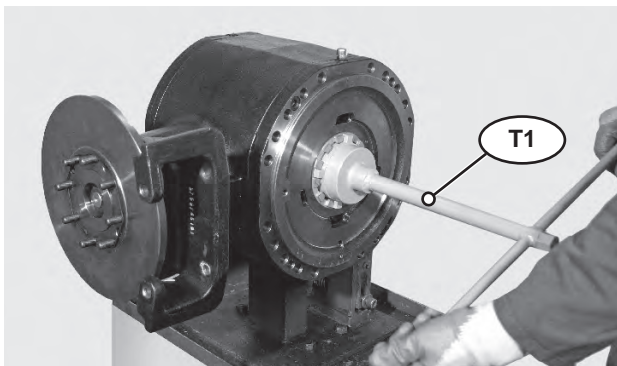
Only if ring nuts have been removed: Preload bearings with ring nut (26) on non-gear ring side in order to increase the torque of the pinion.
